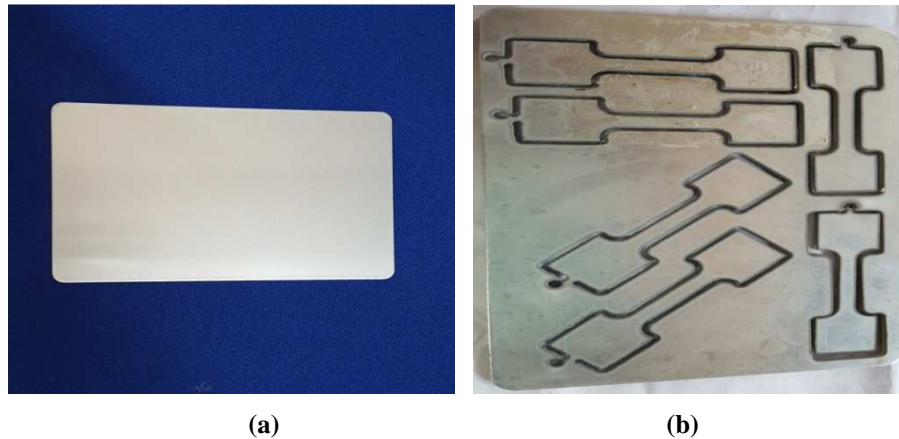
(a) Test Sample Before Machining and (b) After Machining
